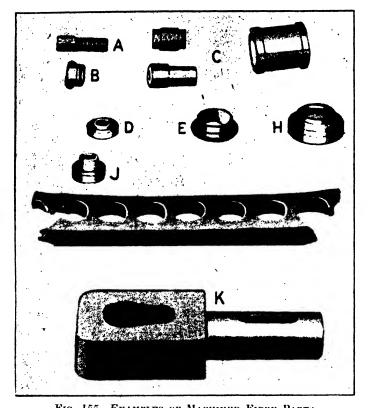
EXAMPLES OF MACHINED FIBRE PARTS A and B = screwed parts; C = cylinders made by upset or drawing processes; D, E, H, J = parts made by punching and turning; K = a more elaborate article made by punching and turning.
